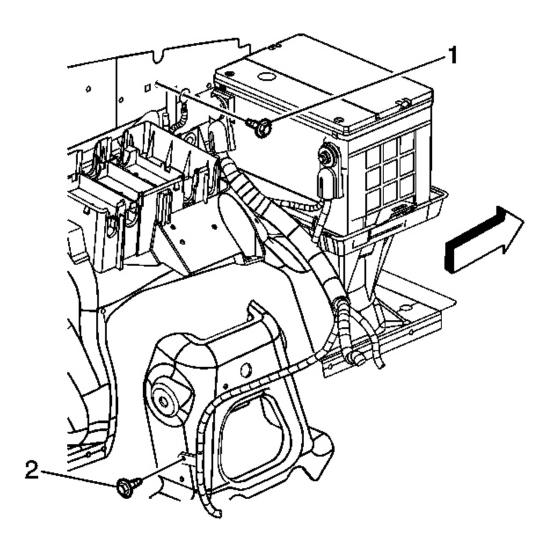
View Of Front Wheelhouse Panel Bolt & Shock Tower Bolt
